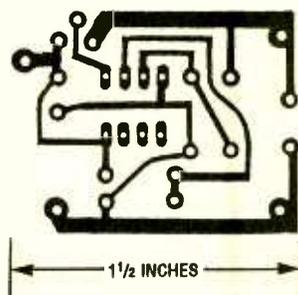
The linear regulator was also assembled on a small section of printed-circuit board. Here is a template of that foil pattern.
